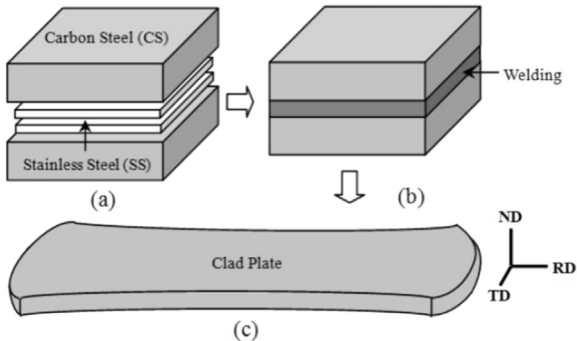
Simplified diagrams of the clad plate production process. (a) Surface finishing and assembling; (b) Welding and vacuuming; (c) Hot rolling.
